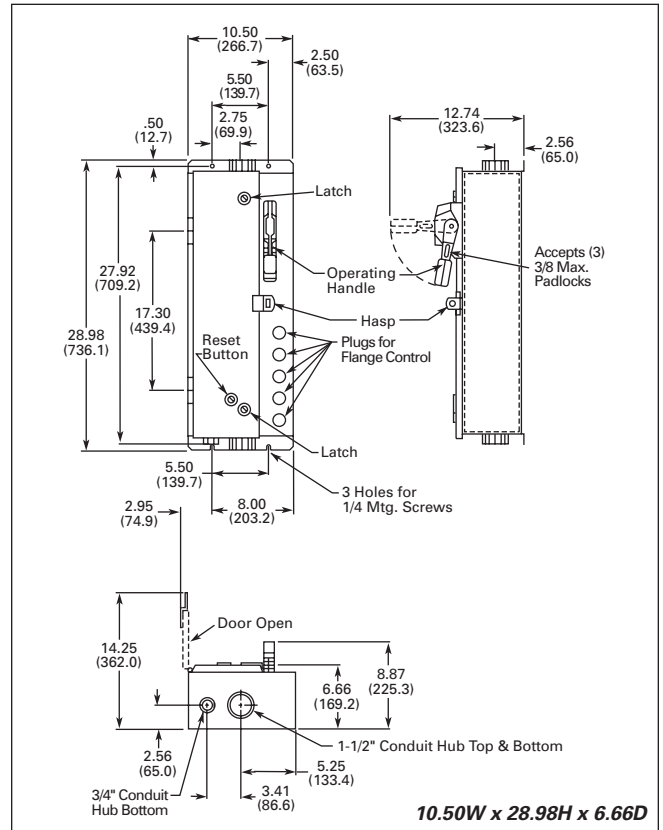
Box A, Type 4X — Approximate Dimensions in Inches (mm)
